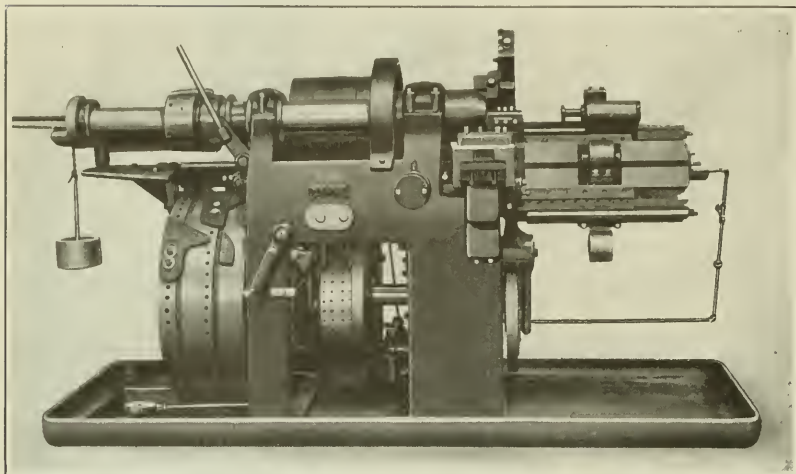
Front View of Gridley Single-spindle Automatic Turret Lathe
